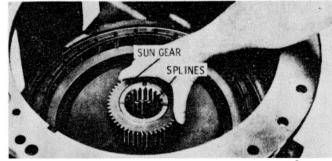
Installing Fifth-and-Sixth-Gear Clutch Drum
